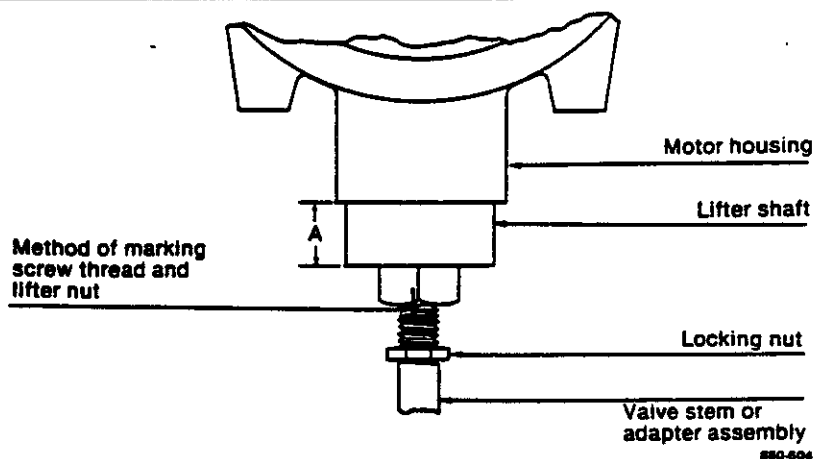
Illustration showing connection of valve stem or adaptor assembly to actionator lifter assembly
